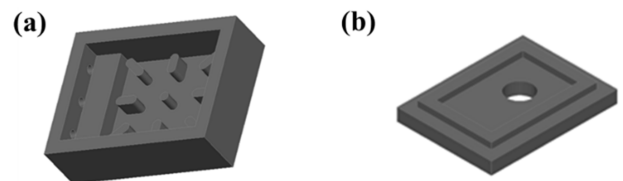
Sensor case manufactured using 3D printer; (a) bottom case, (b) top cover
